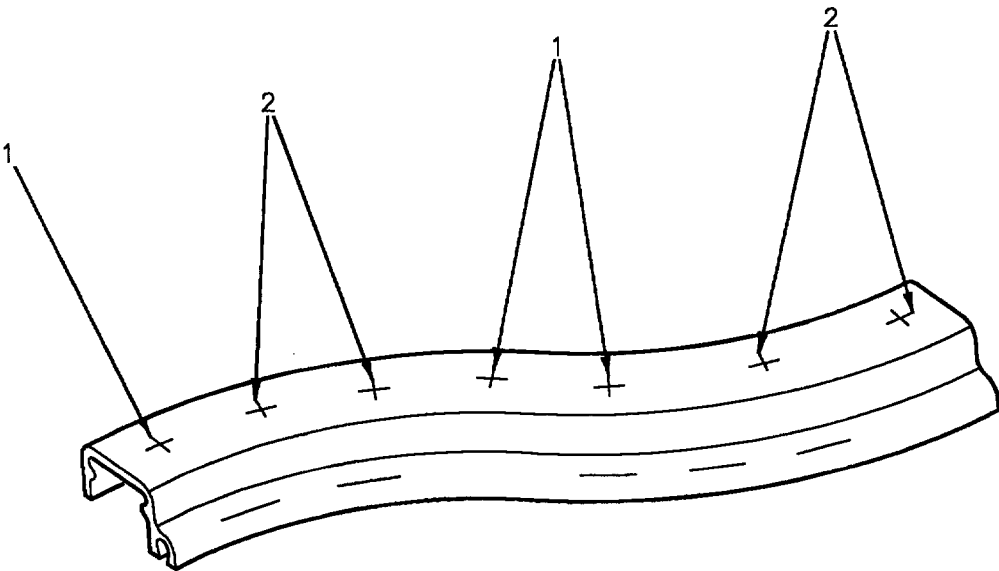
Inspection and Replacement - Seal Guide (Sheet 3)
